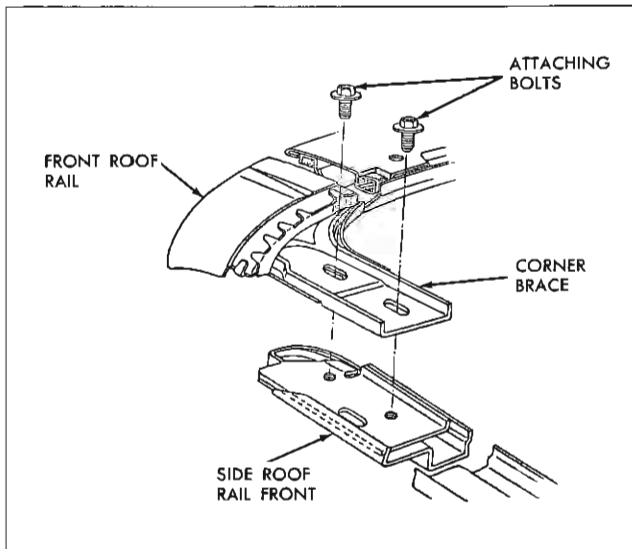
Pontiac Front Roof Rail Adjustment
